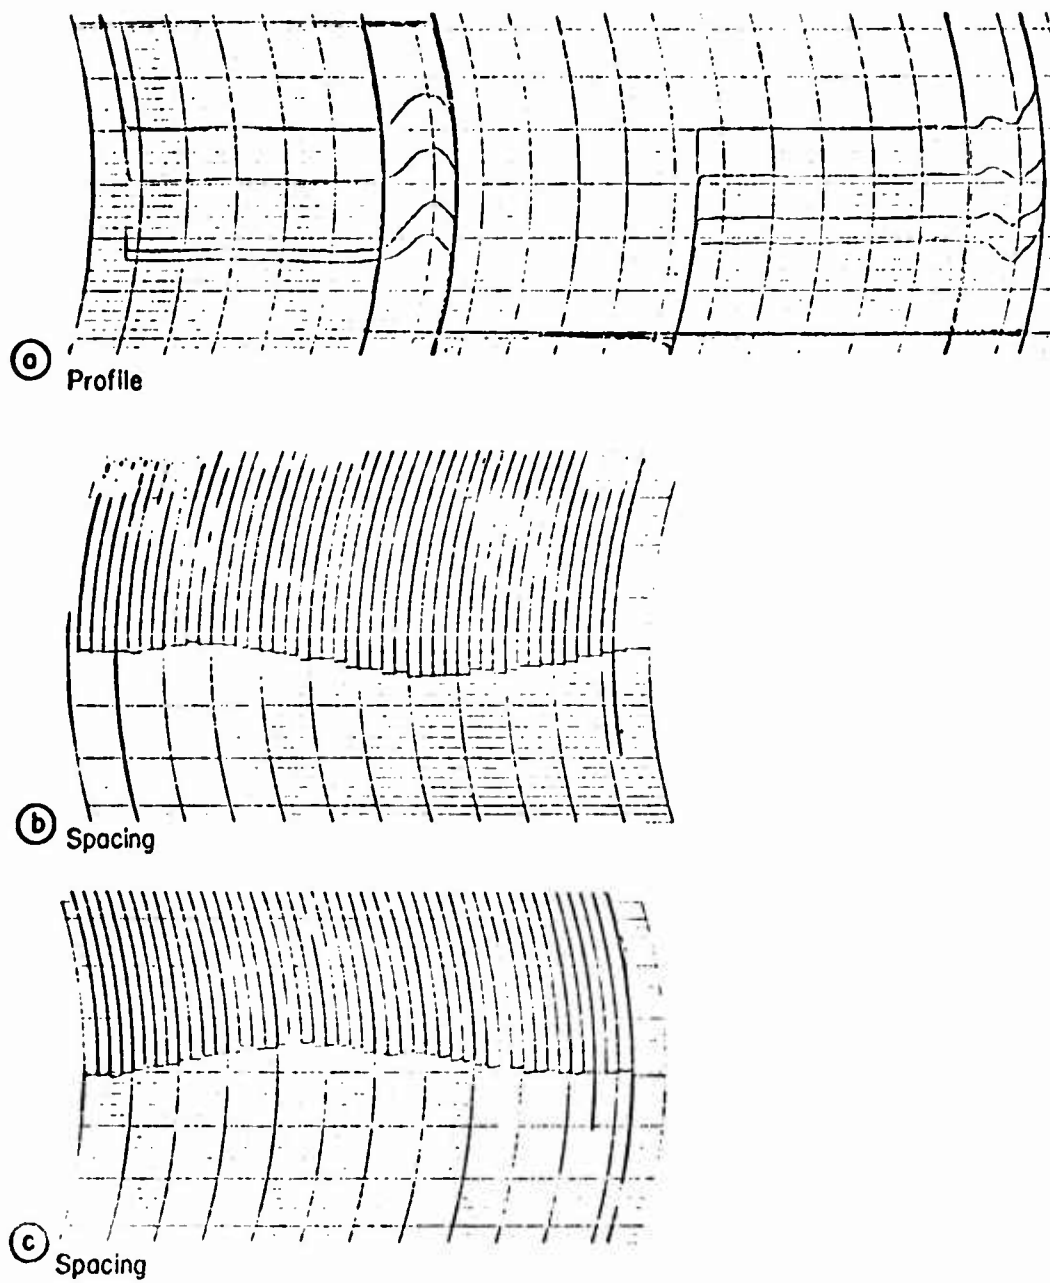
Gear Measurements for Typical New Generator Drive Gear.
